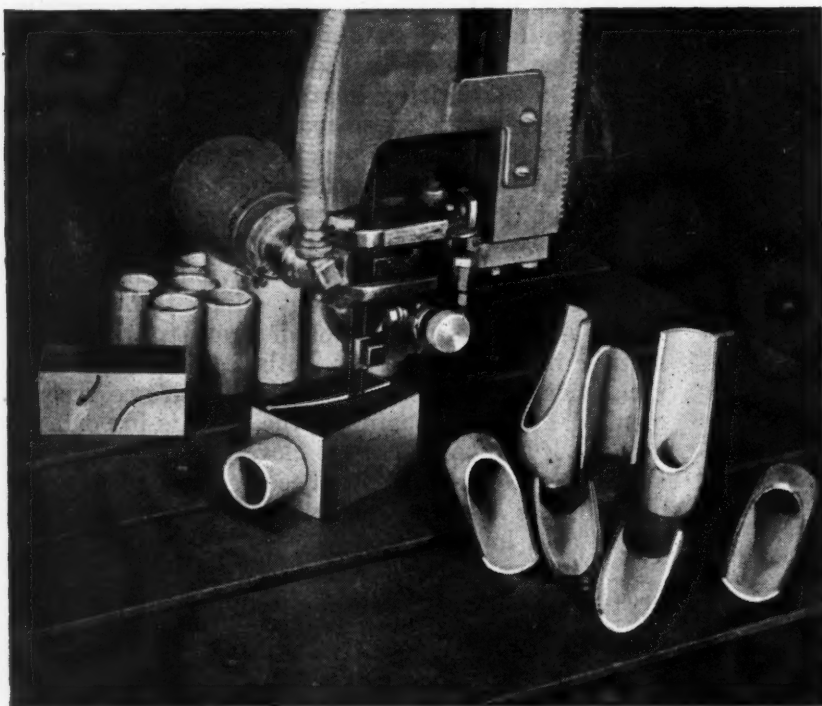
Stainless-steel Pipe is Rapidly Sawed in the Simple Steel Block Fixture Shown
